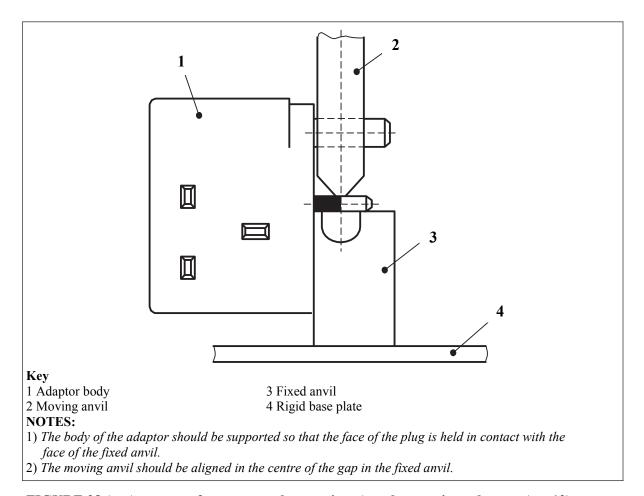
Apparatus for tests on adaptor pins: An adaptor pin under test (see 12)
